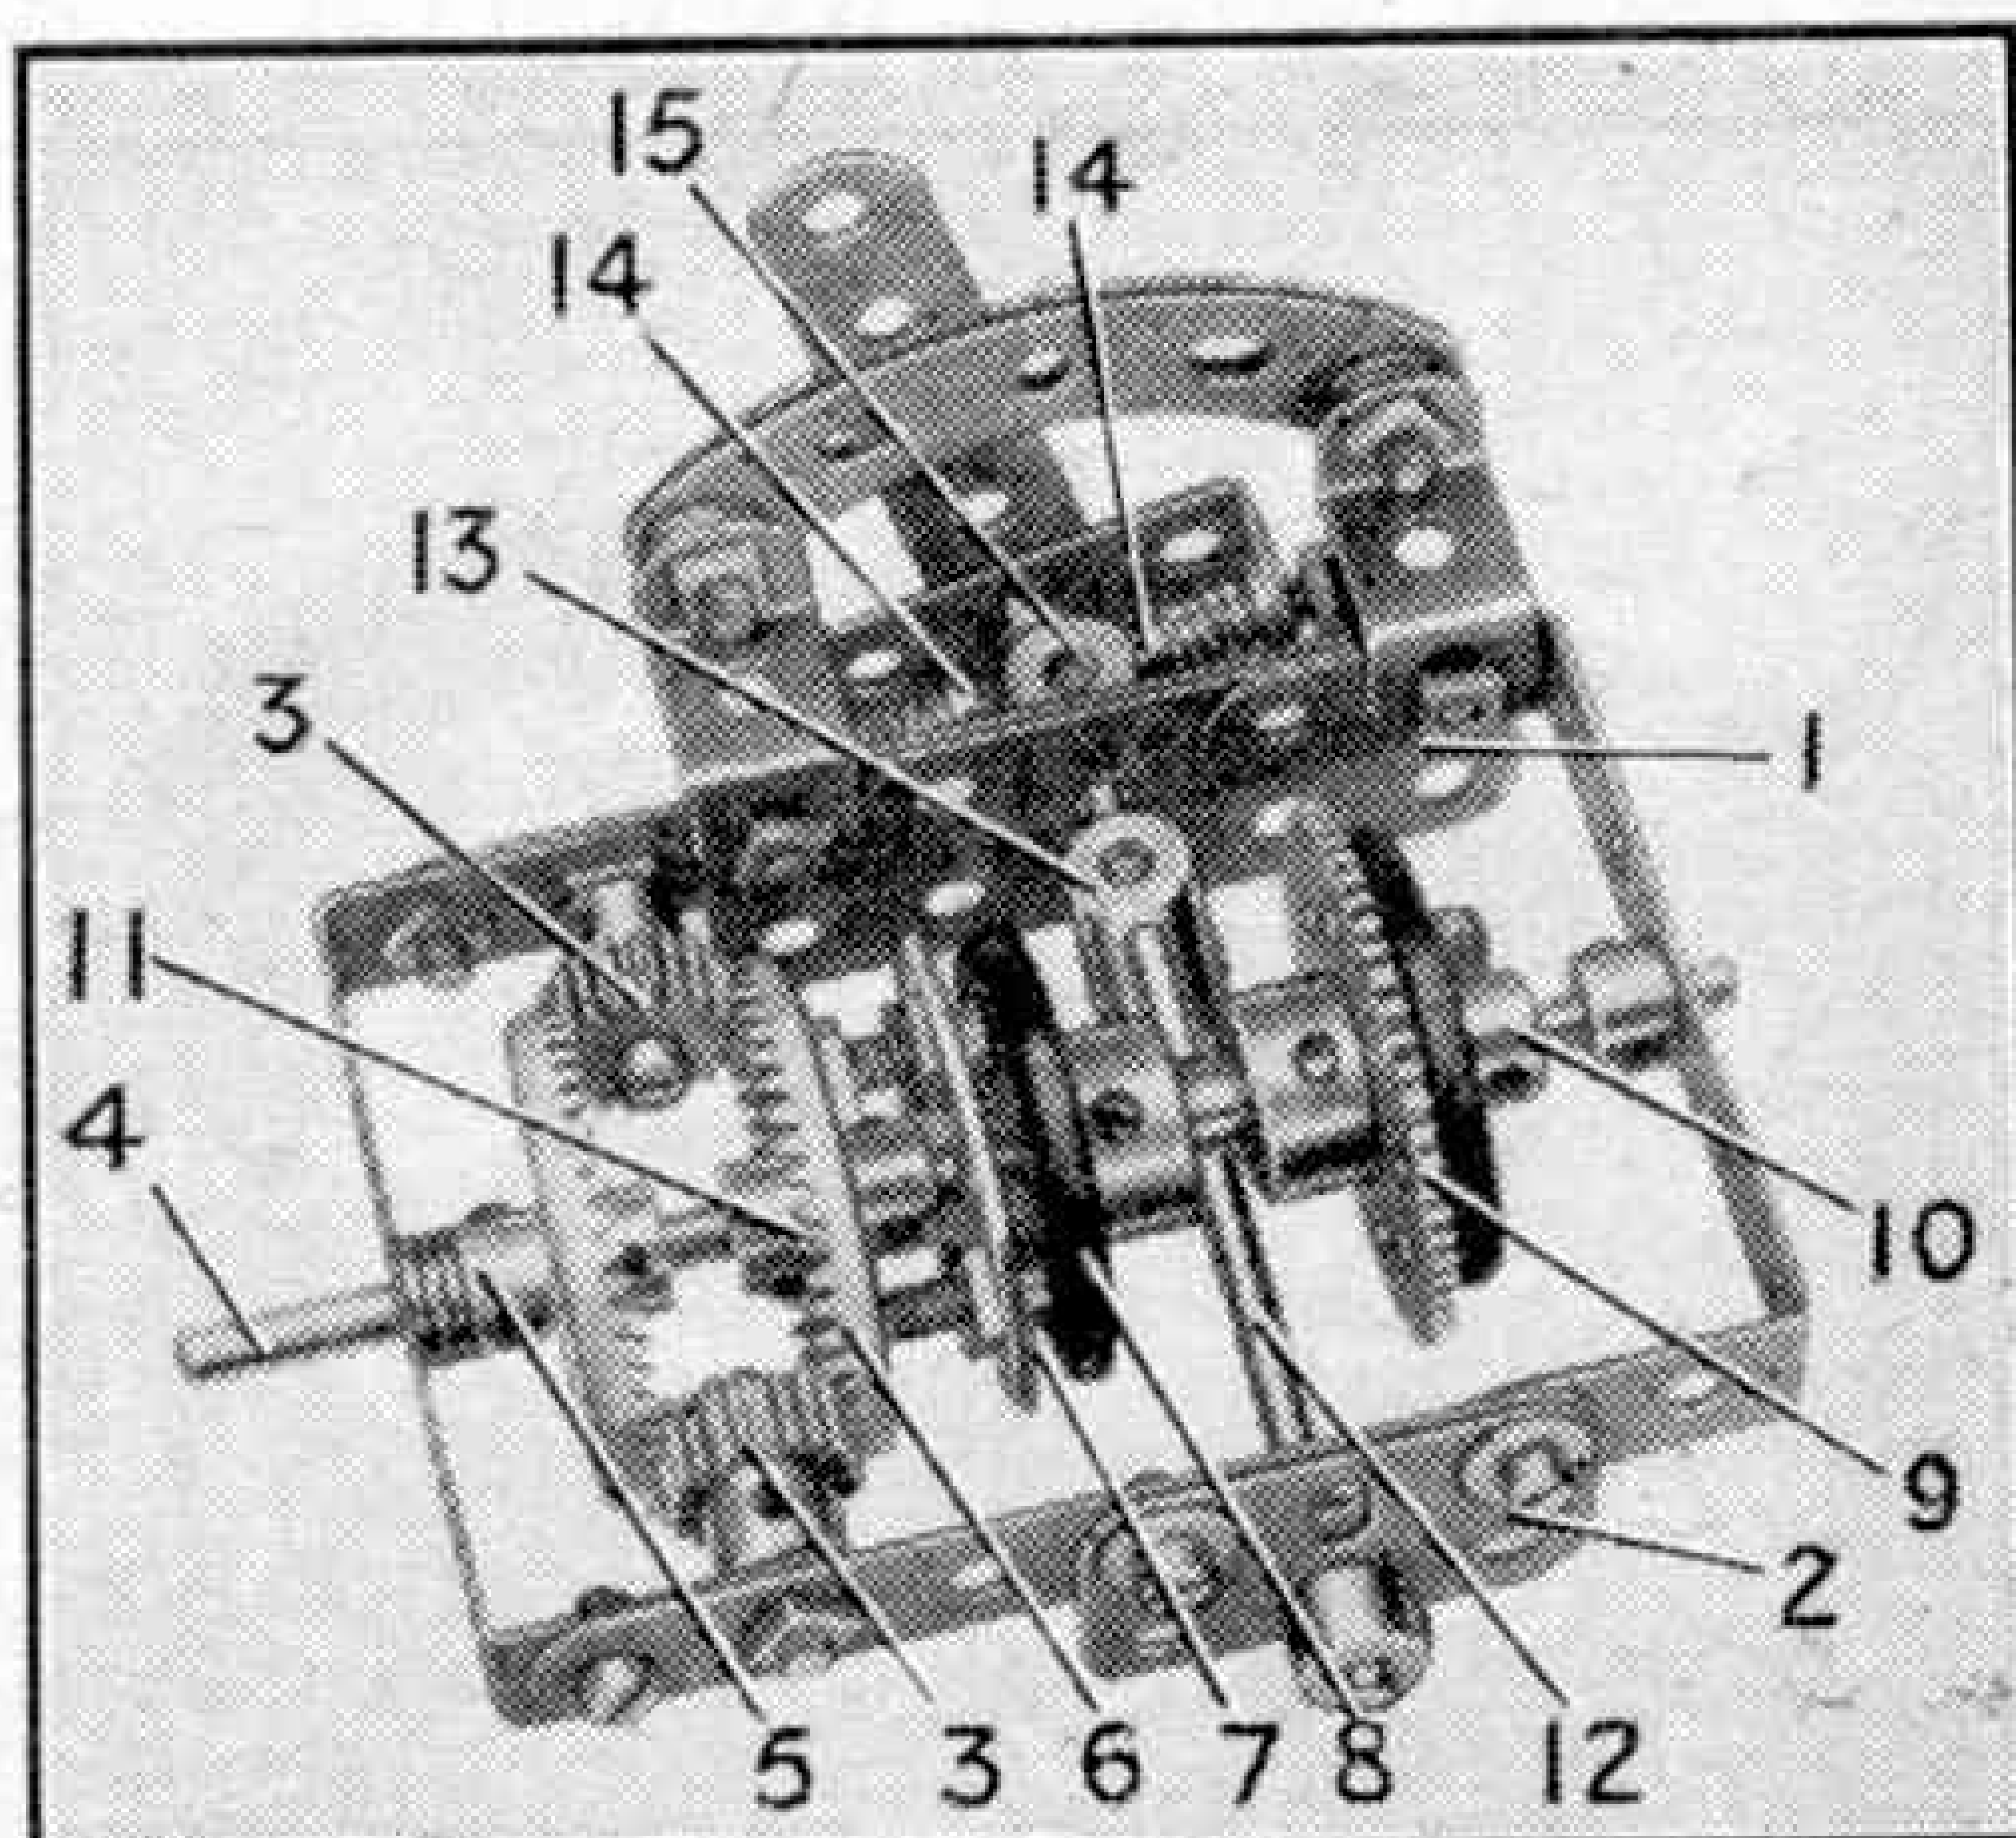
An ingenious reversing mechanism in which the gears are in constant mesh. Forward and reverse drives are engaged through friction clutches.
